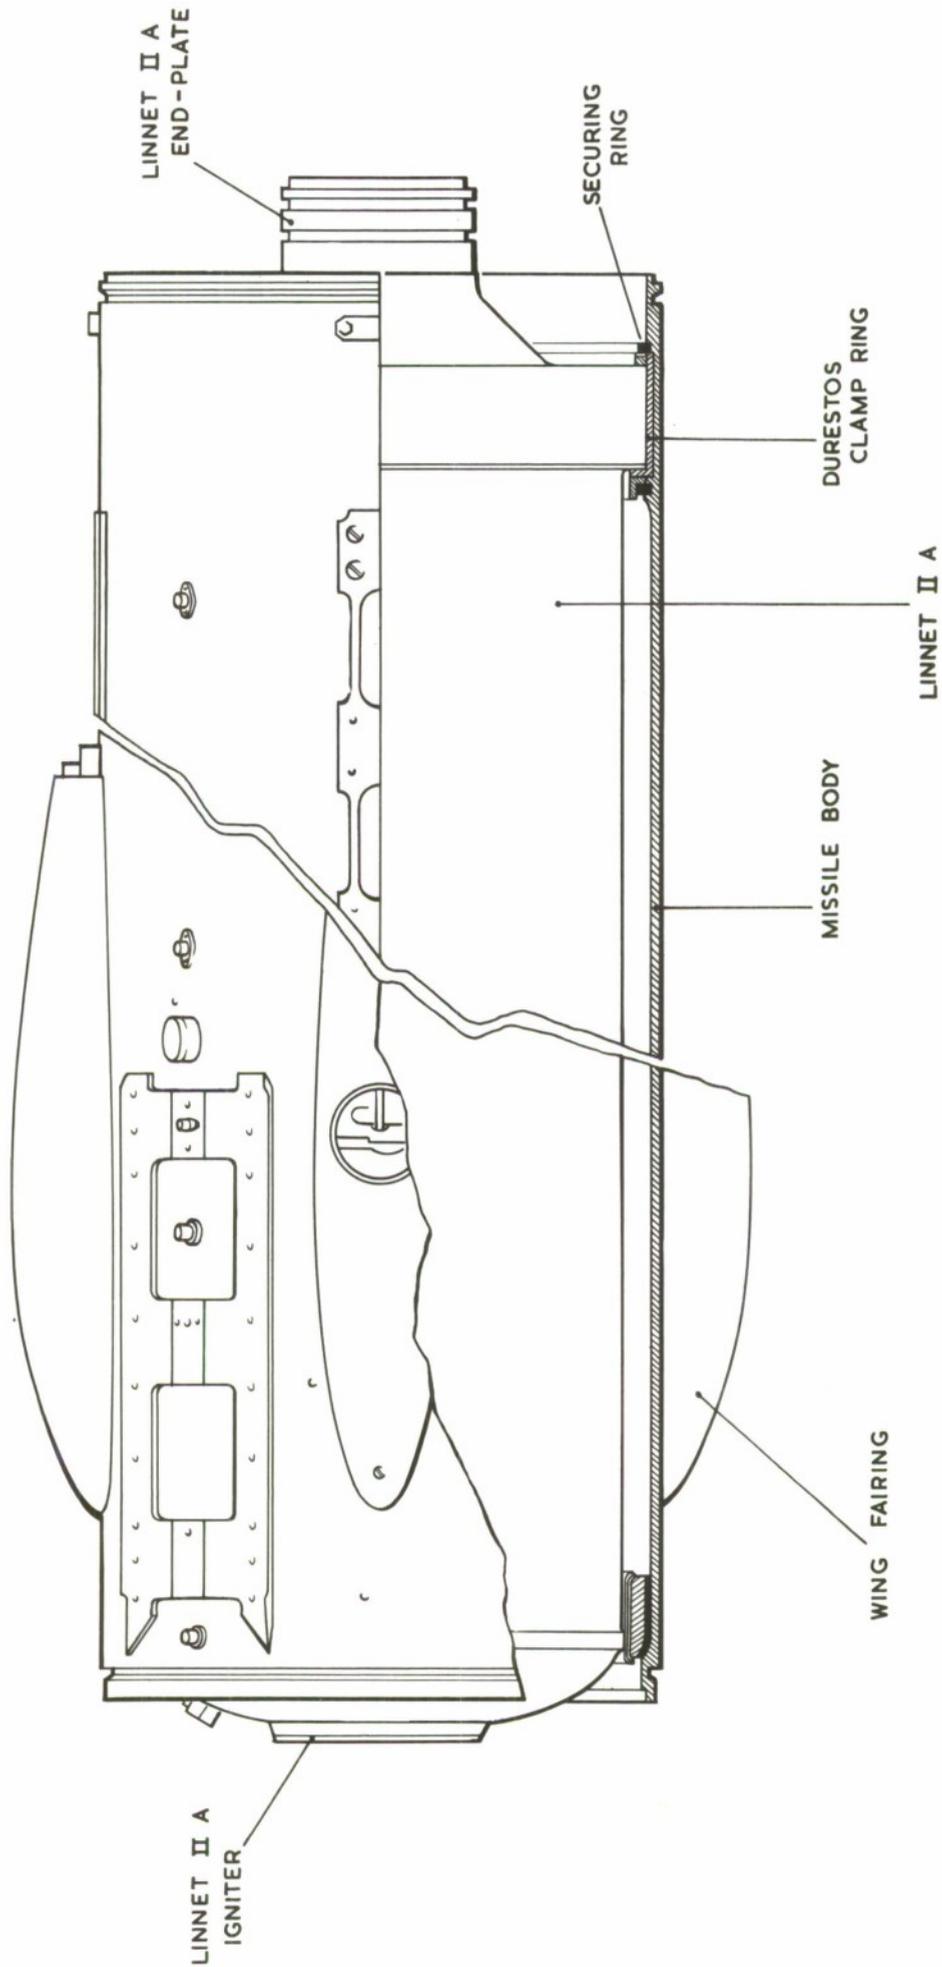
ASSEMBLY OF LINNET II A IN MISSILE CENTRE SECTION
